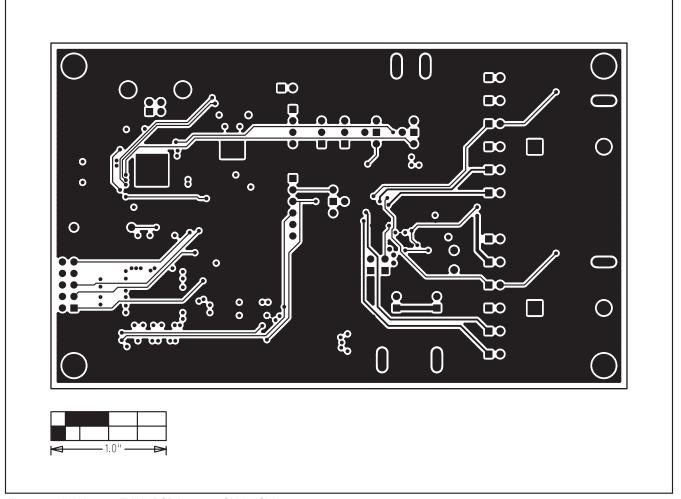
MAX11014 EV Kit PCB Layout—Solder Side
